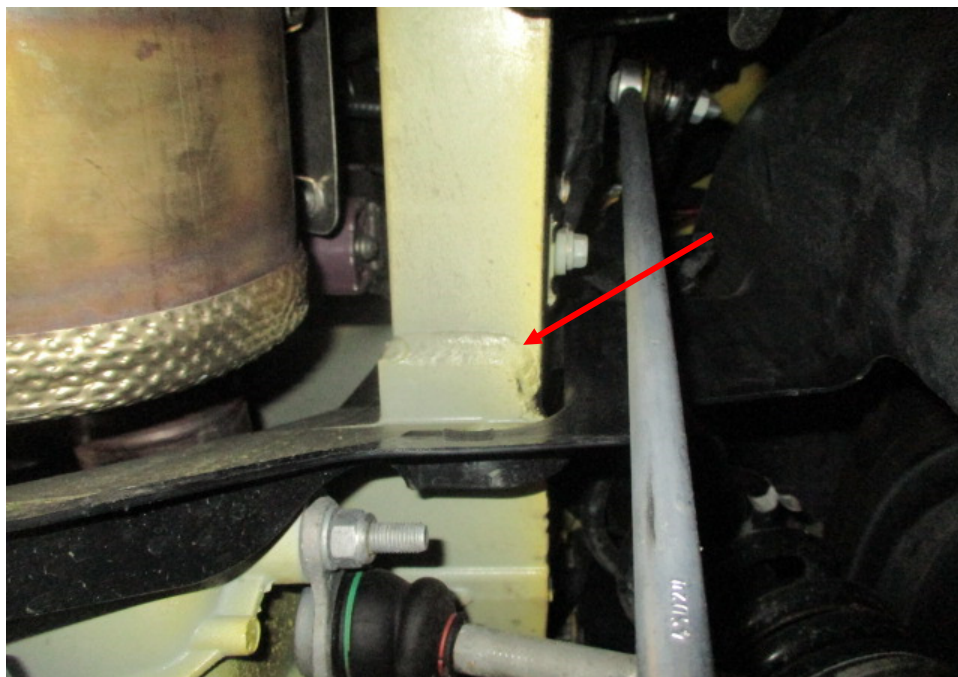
shows the Motor Car's exhaust system after removal of the rear bumper diffuser and rear under cover. In general, my examination of the Motor Car's exhaust system revealed no sign(s) or indication(s) of any cut or weld marks along its exhaust pipes, on its catalytic converters and on its rear mufflers.
